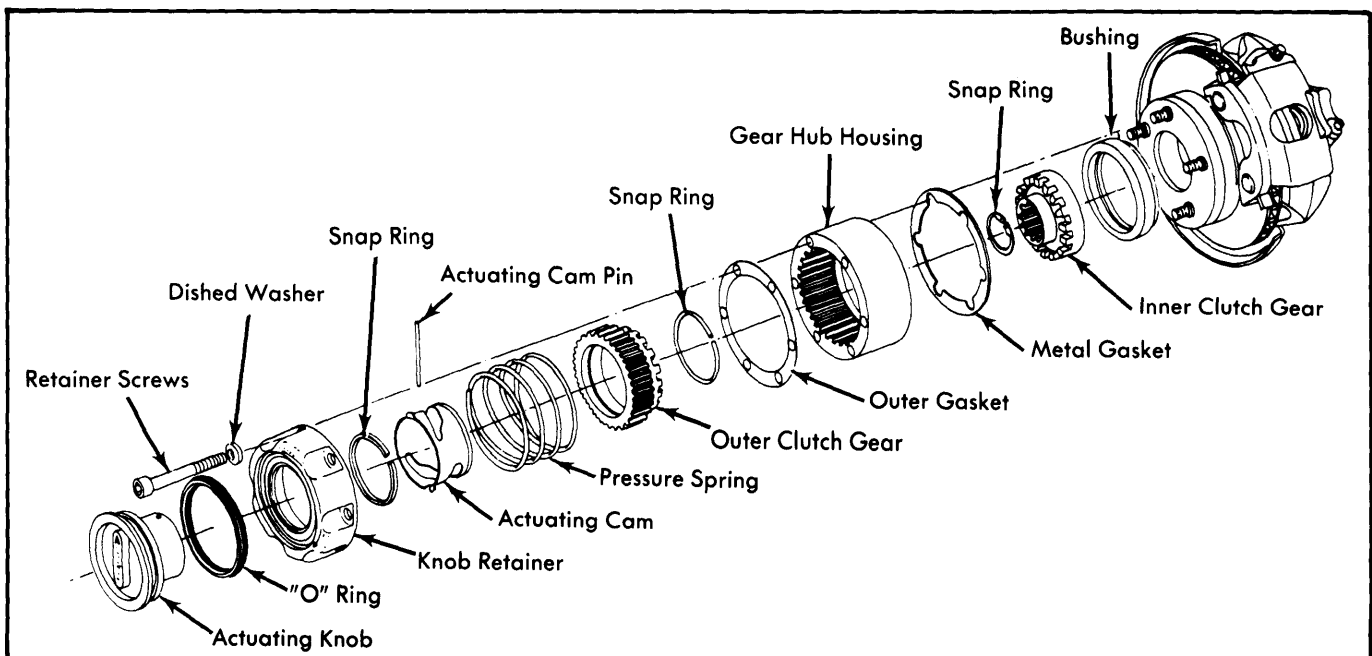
Exploded View of Dana/Spicer External Locking Hub
